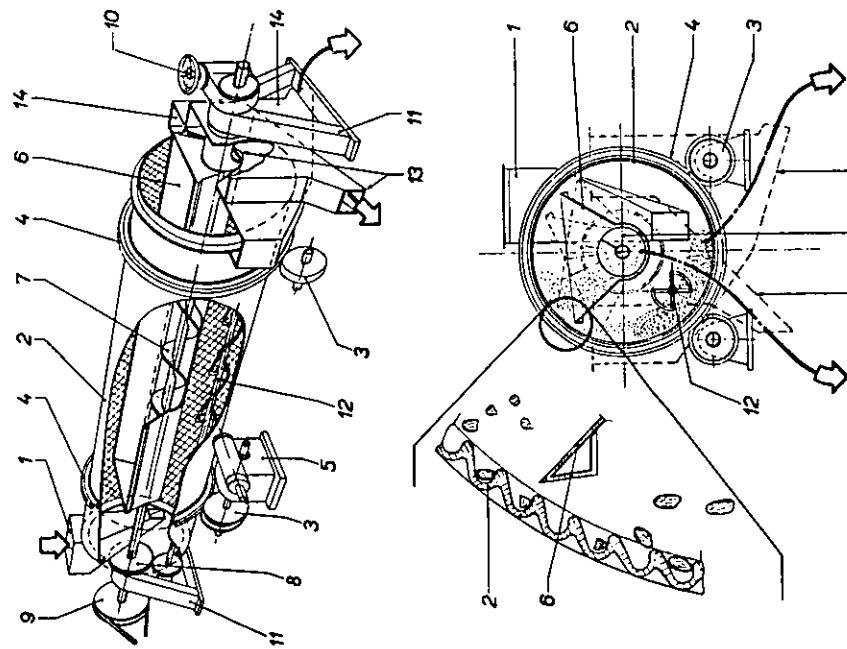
Indented cylinder separator. (1) Feed hopper. (2) Indented cylinder. (3) Cylinder supporting roll. (4) Outer cylinder ring. (5) Speed reduction unit. (6) Collecting tray. (7) Screw conveyor and spreader drive pulley. (8) Grain spreader. (9) Tray position adjustment handwheel. (10) Machine frame. (11) Grain outlet. (12) Liftings outlet. (13) Grain outlet. (14) Grain outlet. Courtesy of Food and Agriculture Organization of the United Nations (Borasio and Garibaldi 1957).
